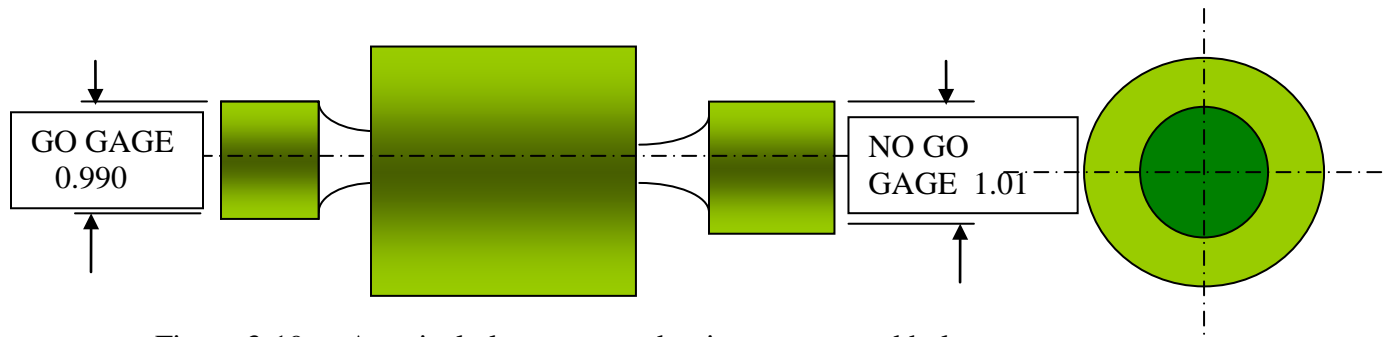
A typical plug gage used to inspect a round hole.
